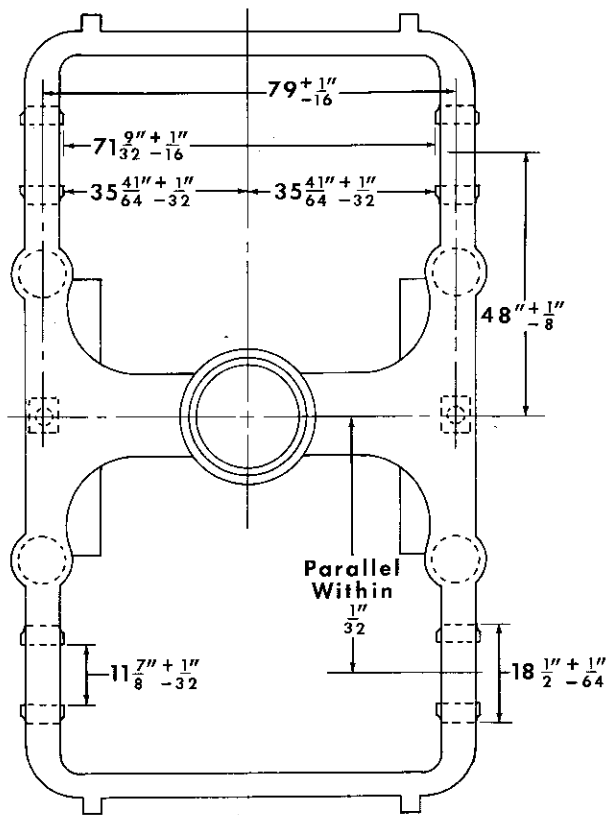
Four Wheel Swing Hanger Frame Dimensions
